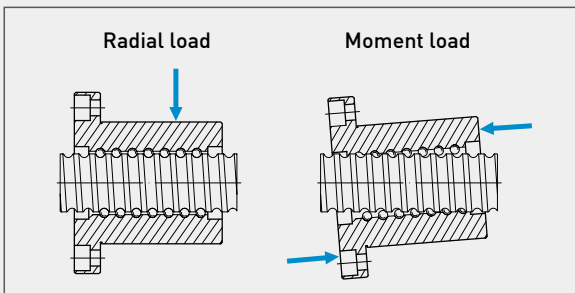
(a) Unbalance load caused by misalignment of the support bearings and nut brackets, inaccurate alignment of the guide surface, inaccurate angle or alignment of the nut mounting surface
